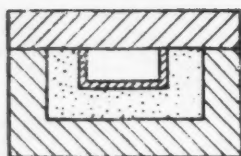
Cross-section of a length of precision waveguide fabricated with electroformed channel moulded into a cast channel with Cerro-cast or loaded resin, and with a ground plate supplying the fourth side.
